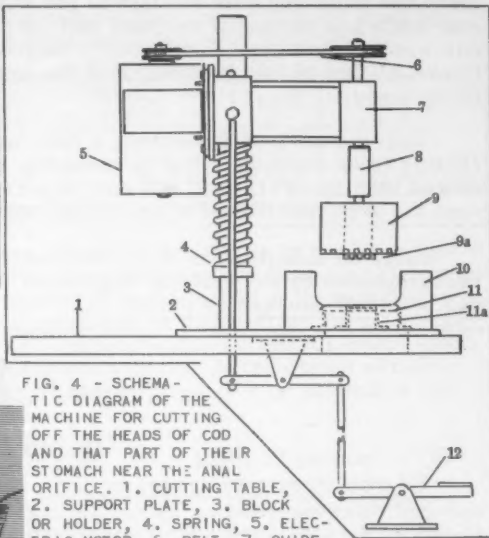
SCHEMATIC DIAGRAM OF THE MACHINE FOR CUTTING OFF THE HEADS OF COD AND THAT PART OF THEIR STOMACH NEAR THE ANAL ORIFICE. 1, CUTTING TABLE, 2, SUPPORT PLATE, 3, BLOCK OR HOLDER, 4, SPRING, 5, ELECTRIC MOTOR, 6, BELT, 7, GUIDE, 8, SHAFT, 9 & 9A, REMOVABLE CIRCULAR KNIVES FOR CUTTING THE HEAD OR STOMACH AROUND THE ANAL ORIFICE, 10, SUPPORT PLATE FOR FISH, 11 & 11A, FIXED KNIVES, 12, PEDAL.
